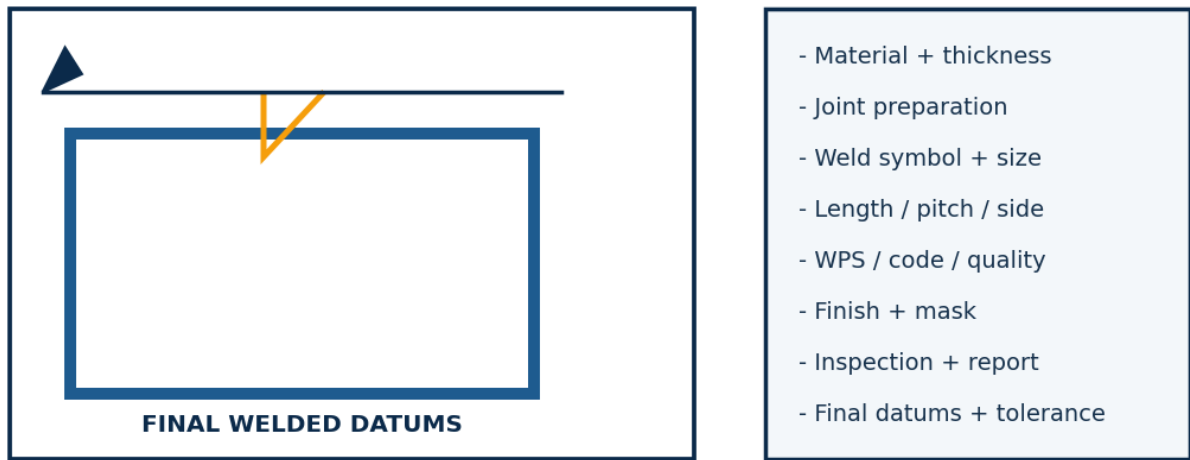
A manufacturable weldment drawing identifies the joint, final datums, quality and inspection requirements.
